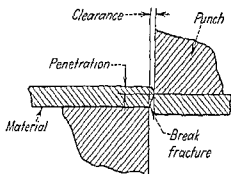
Schematic drawing illustrating clearance, penetration, and fracture.²
